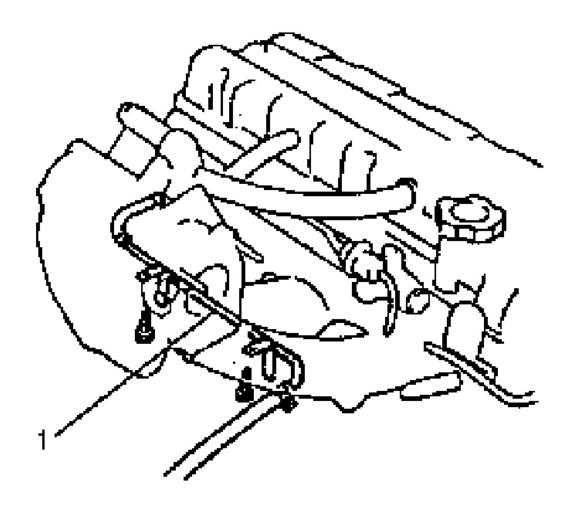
Removing Engine Assembly Courtesy of SUZUKI OF AMERICA CORP.
